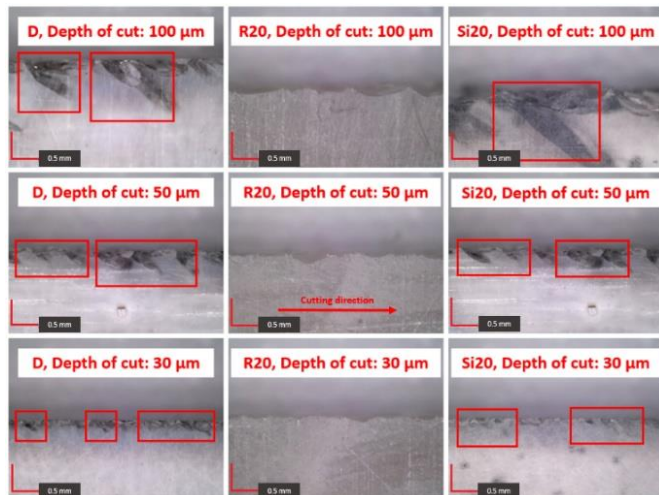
Optical images of the side of DGEBA, R20 and Si20 samples machined at a depth of cut of 30, 50 and 100 μm where red rectangles show the subsurface cracks
